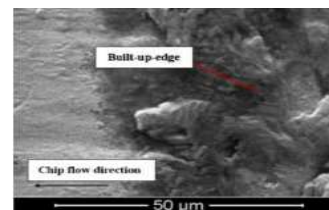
SEM image of the flank wear in machining of Inconel 718 [6]
